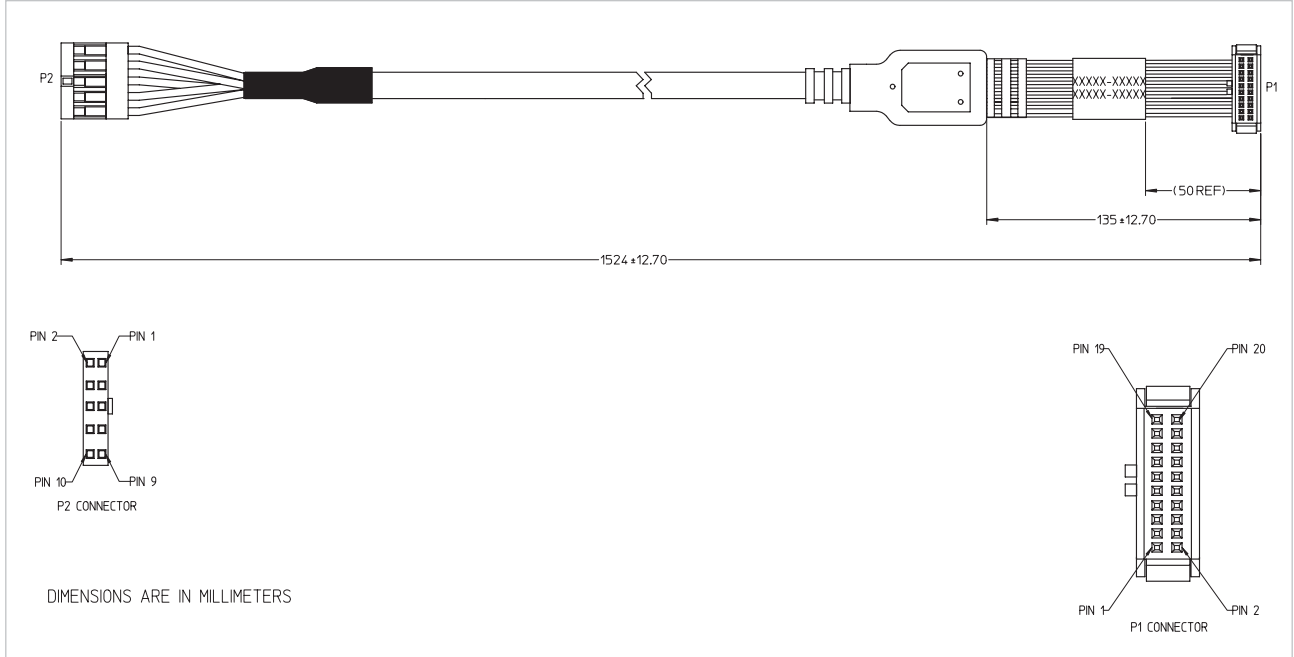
Option 002 - 20 pin to 10 pin interface cable assembly
